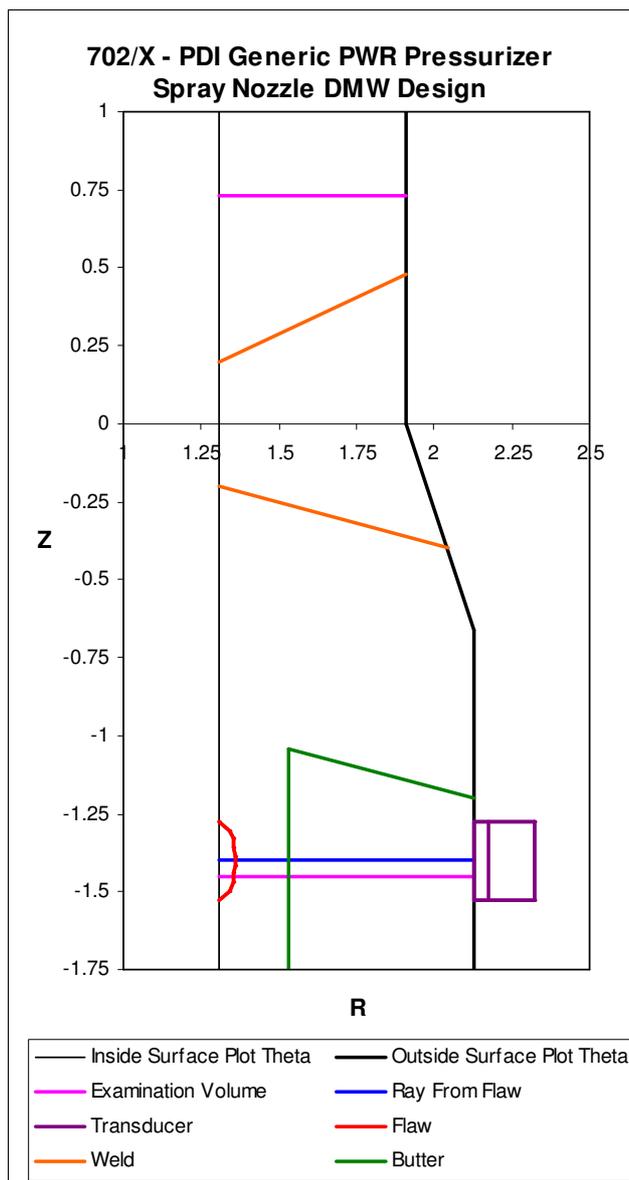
Cross-Section of 702/X - PDI Generic Pressurizer Spray Nozzle Dissimilar Metal Weld Design
